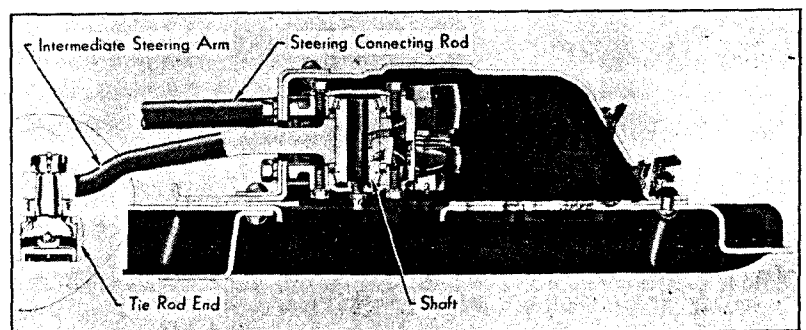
Sectional view of Cadillac intermediate steering arm assembly. The tie-rod and steering arm ends are adjusted by screwing the plug all the way in and then backing it out $\frac{1}{4}$ turn. Use tool No. J-630 for turning the plug. The tie-rod ends on the LaSalle are not adjustable.
